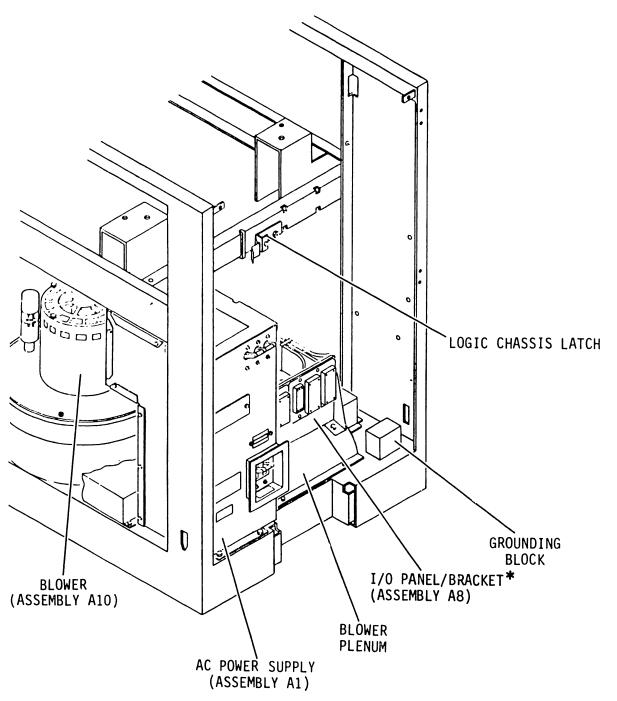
A-1. Assembly Locator (Sheet 1 of 3)
